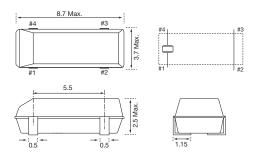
ECX-306I - Top, Side and End views with pin connections
